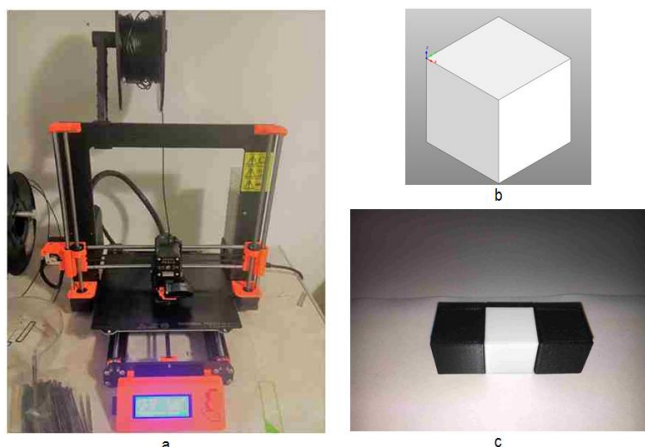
Specimens manufacturing a) FDM machine; b) Printed model; c) Test specimens with different filament materials
